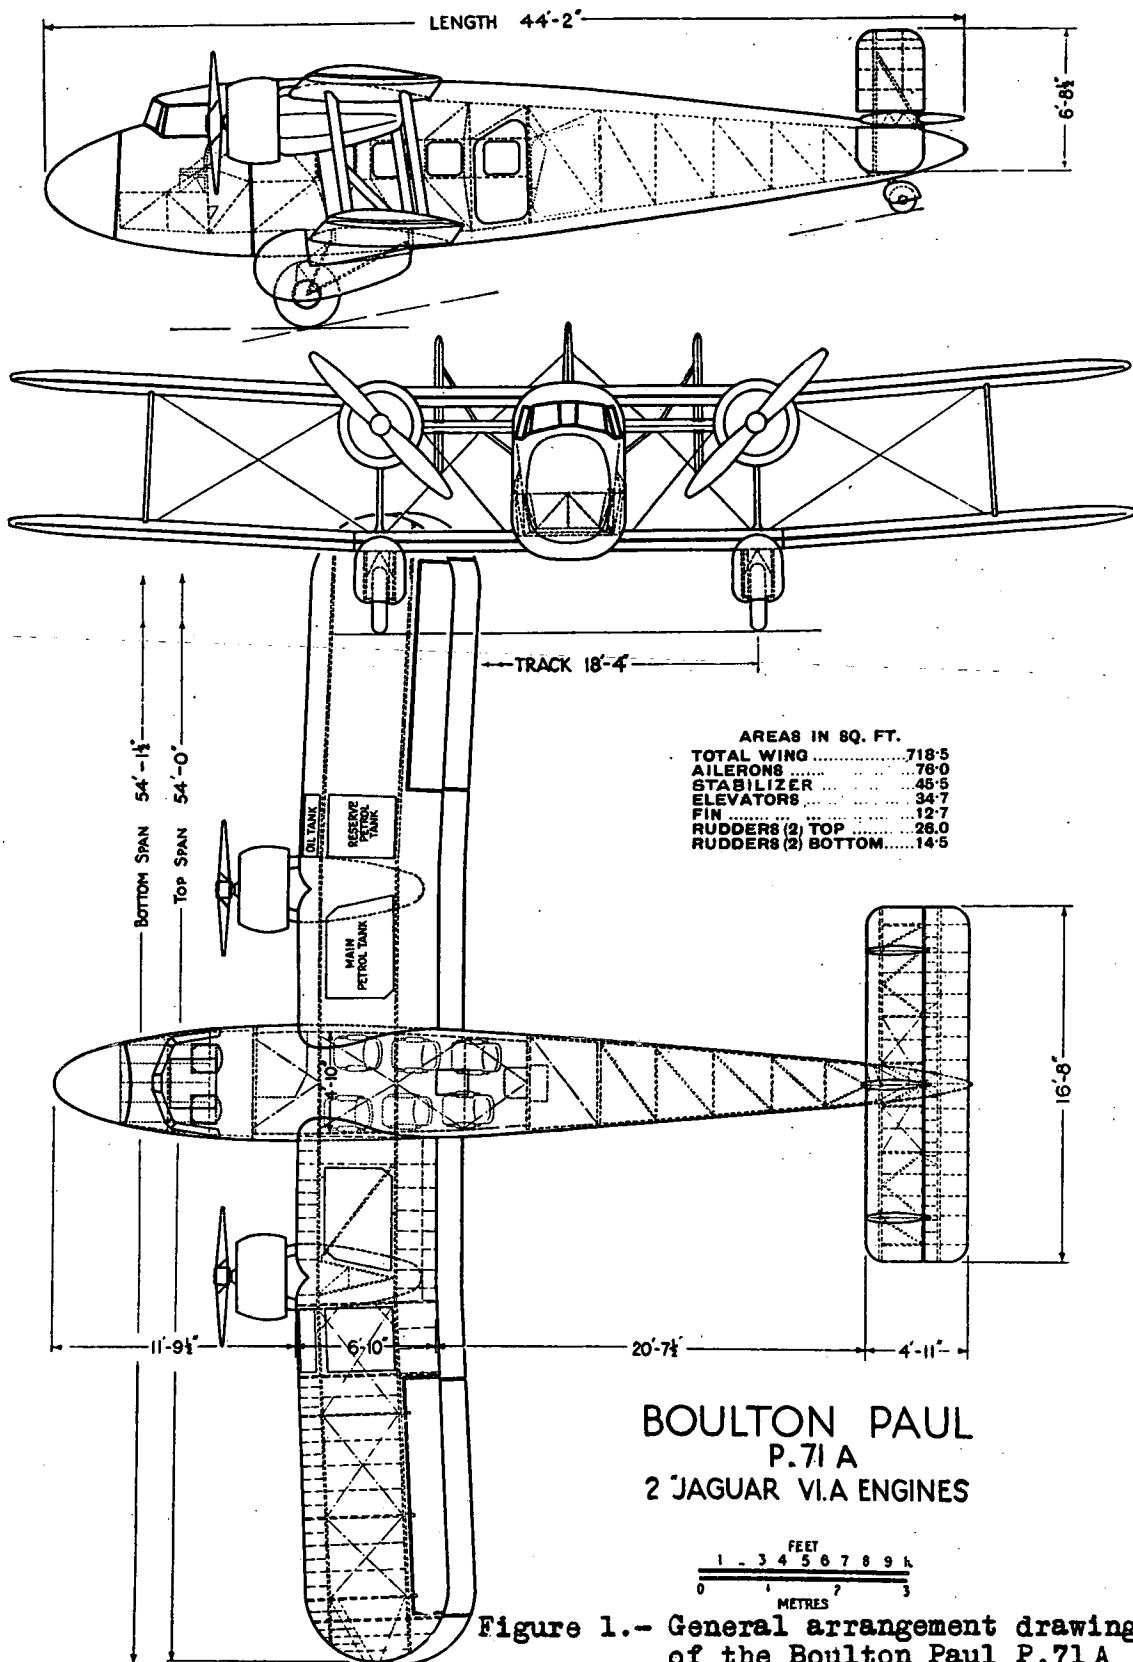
General arrangement drawing of the Boulton Paul P.71A airplane.
